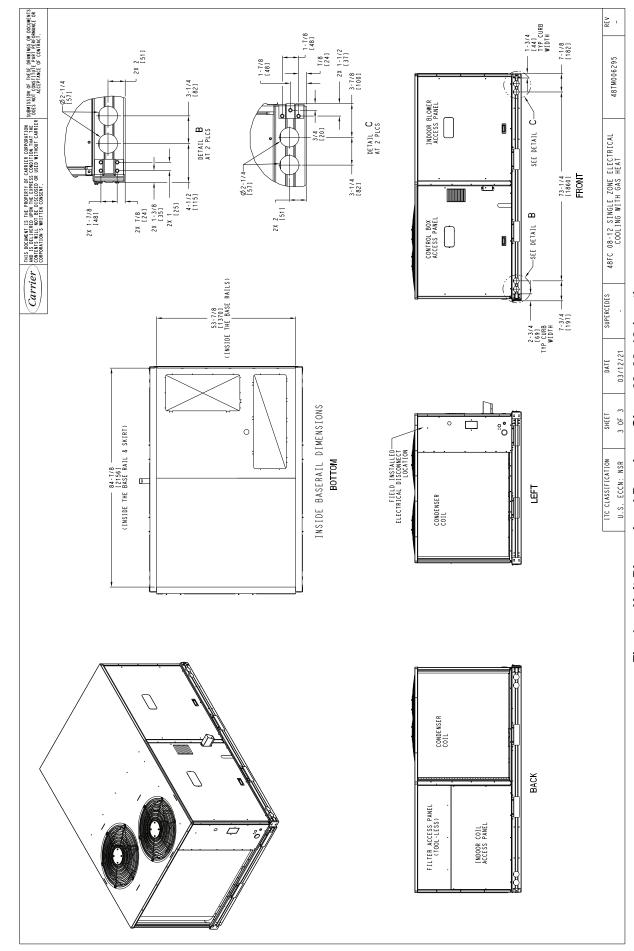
Unit Dimensional Drawing – Sizes 08, 09, 12 (cont)
